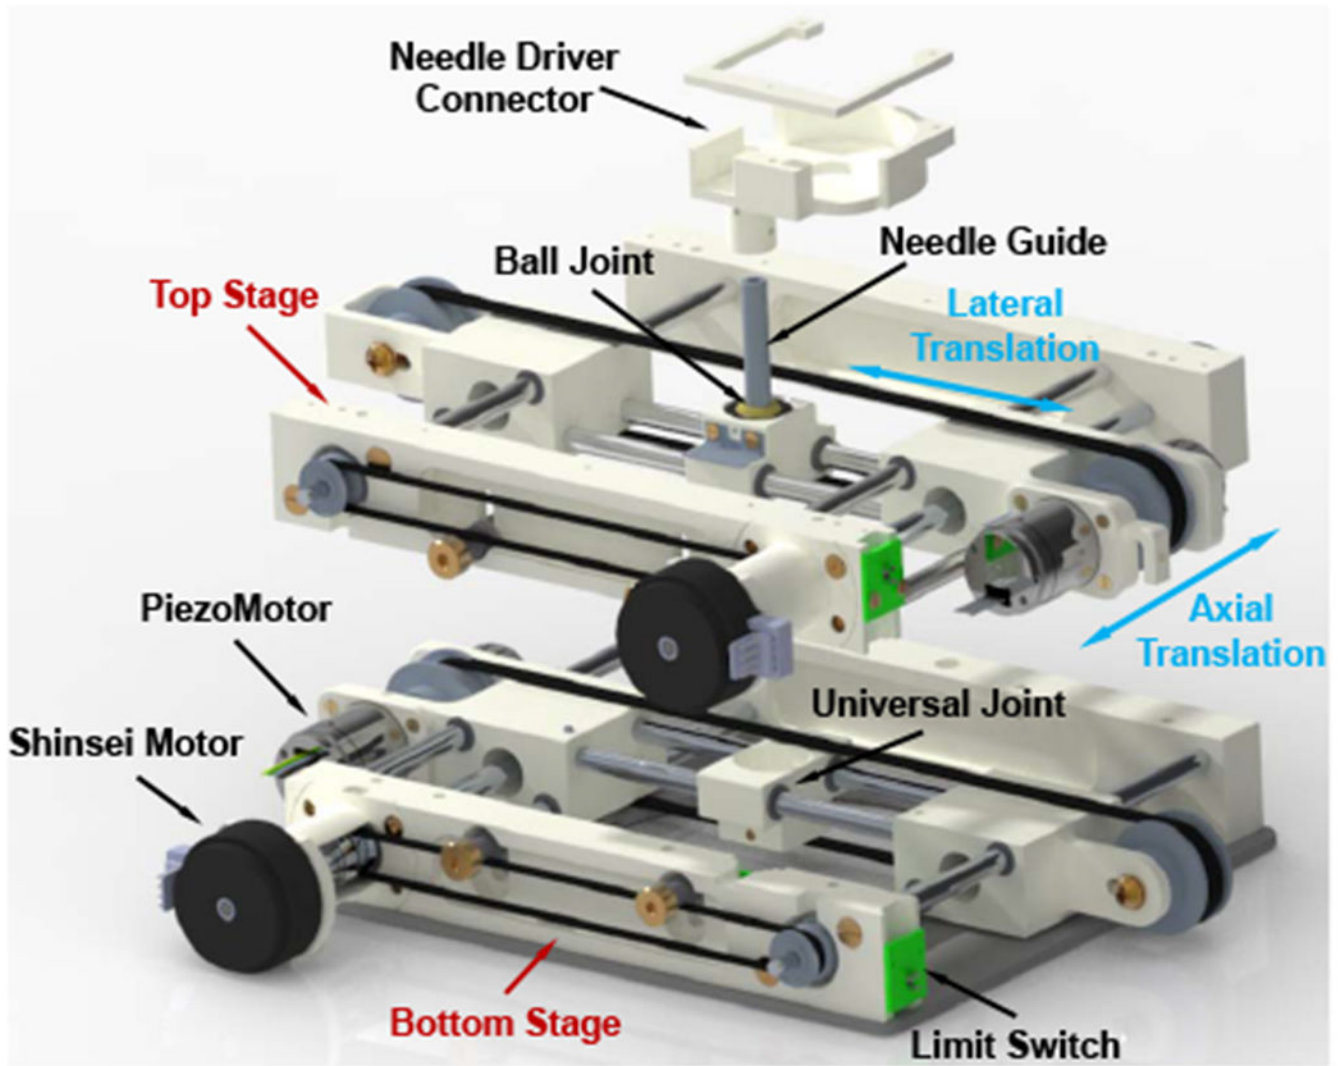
Exploded CAD model of the 4-DOF needle alignment module, showing the major components and translational motions.
